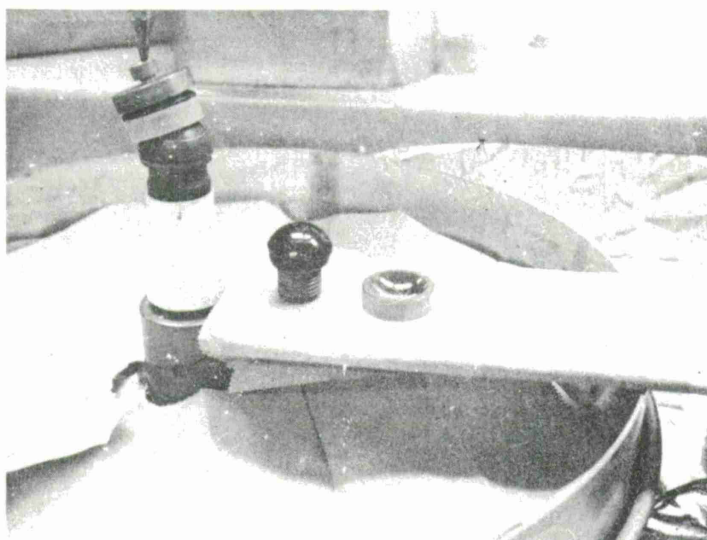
Grinding Tool (On Spindle) and Polisher for -0.689 Inch Radius
